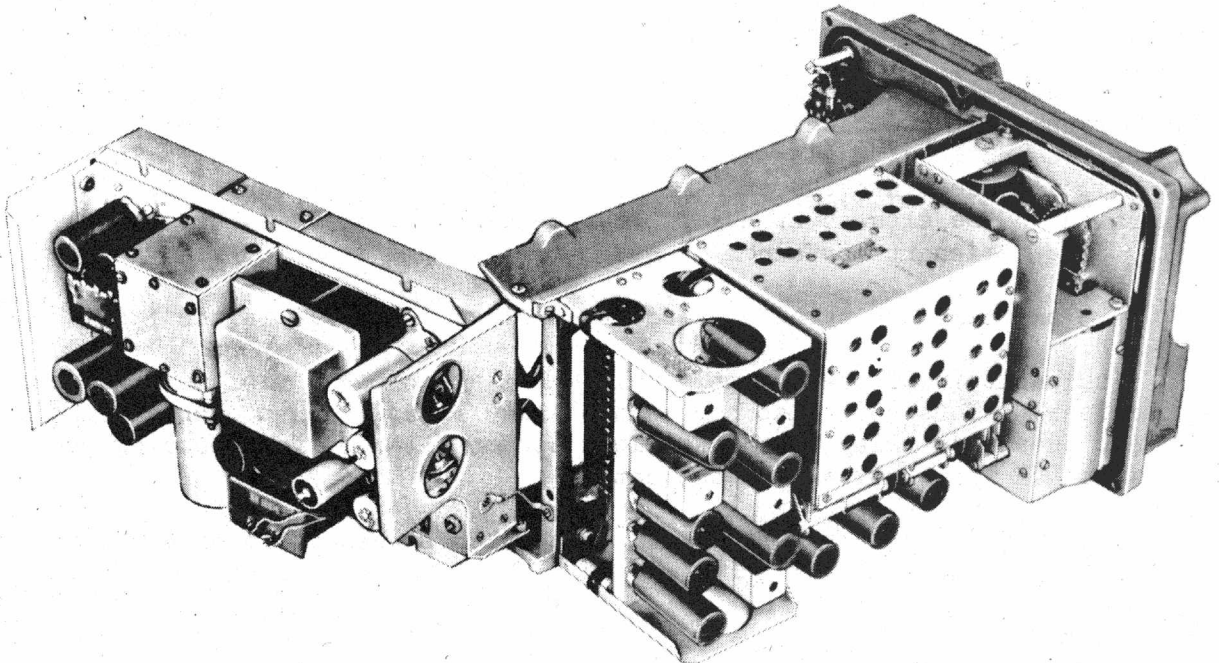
CHASSIS ASSEMBLY HINGED BACK SHOWING TOP SIDE OF UNITS
